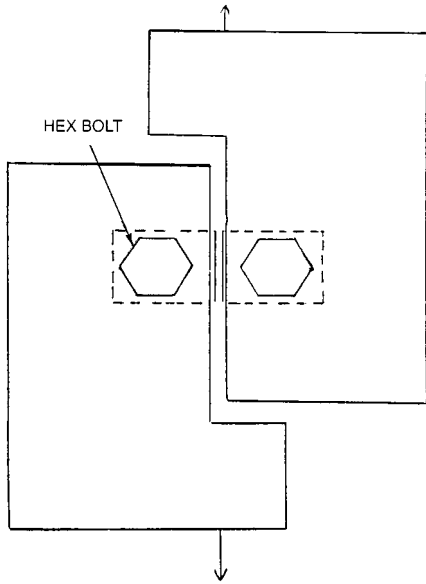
Drawing of the Recommended Shear Test Specimen Assembly
